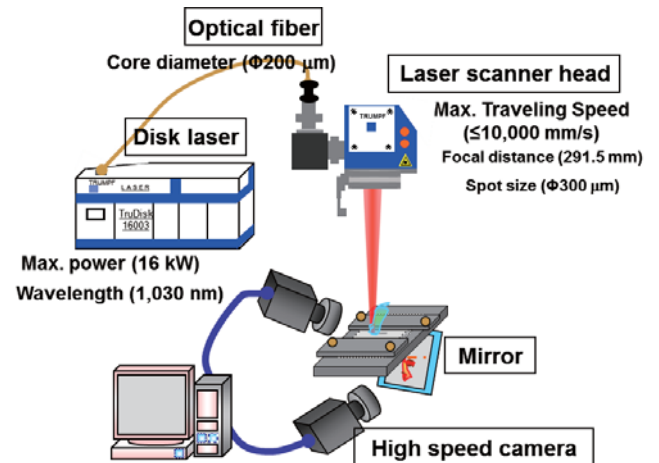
Experimental setup for observation of keyhole behavior and spattering during disk laser lap welding of Zn-coated steel sheets with scanner head.
